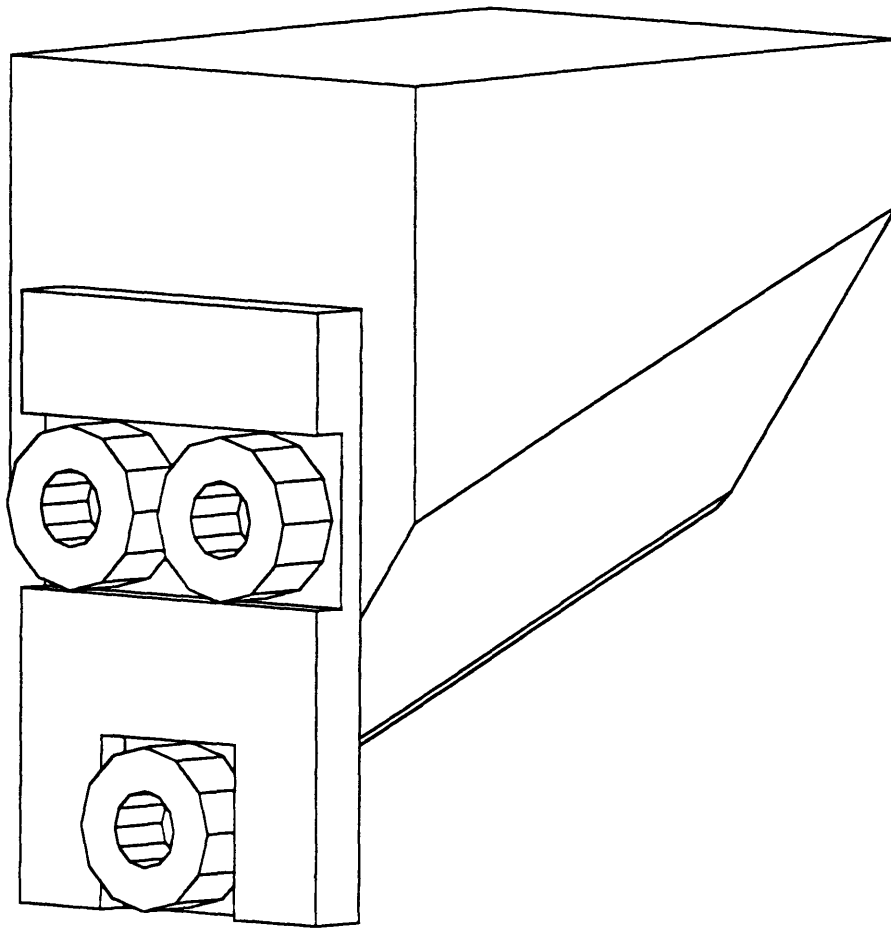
Isometric View of Wedge with Holding Plate and Load Cells
